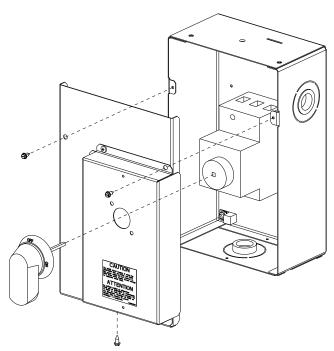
Handle and Shaft Assembly for HACR Circuit Breaker
